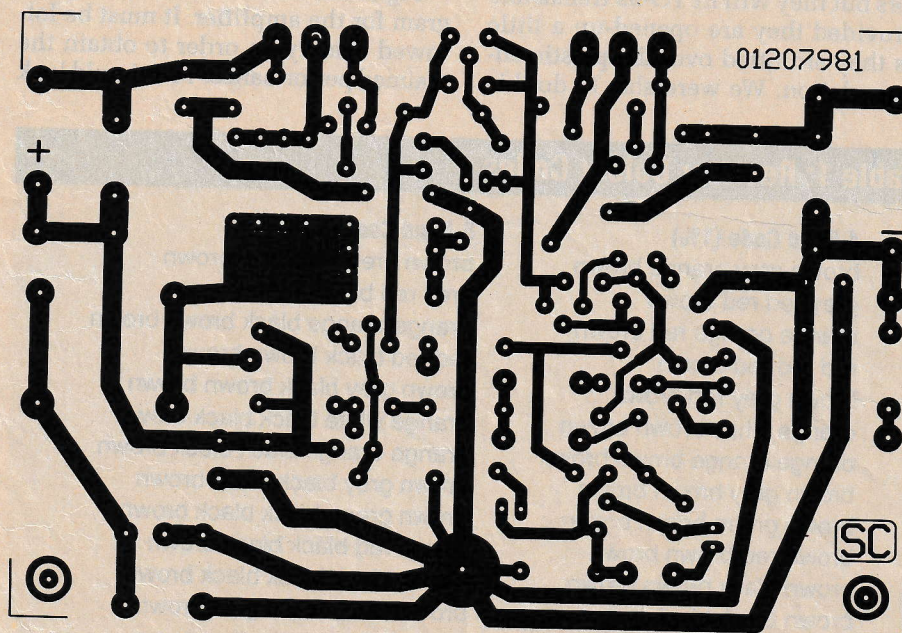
this is the full-size etching pattern for the amplifier PC board.
